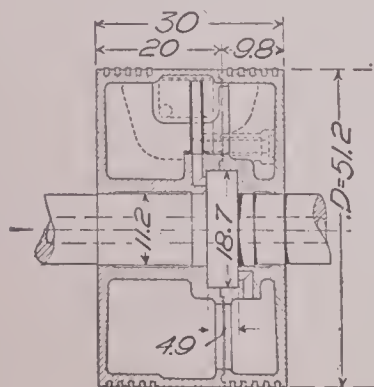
Disk Piston for 1500 H.P. Double-acting, 4-cycle Simplex Engine. (Stroke 55.2", Assembly Drawing in Part III.)
